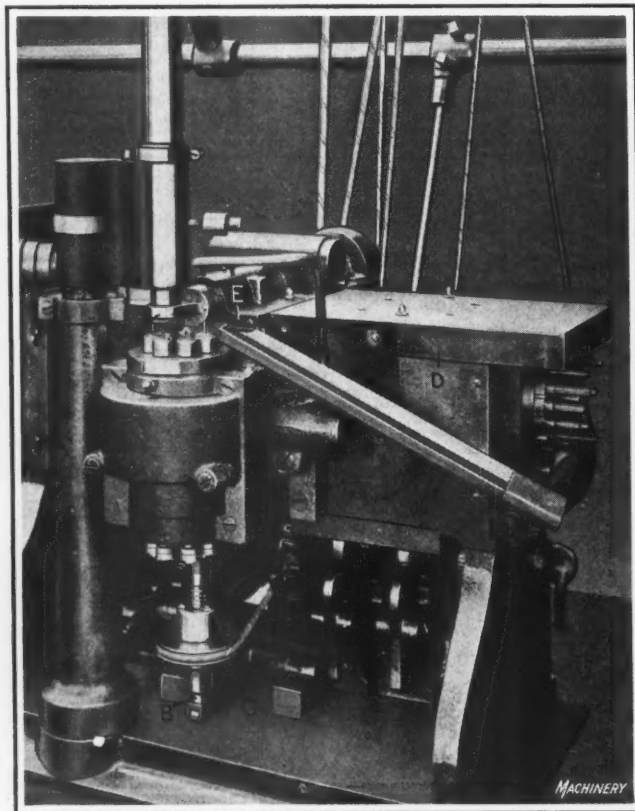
Single-head Plate Drilling Machine operated similarly to Machine shown in Fig. 5
